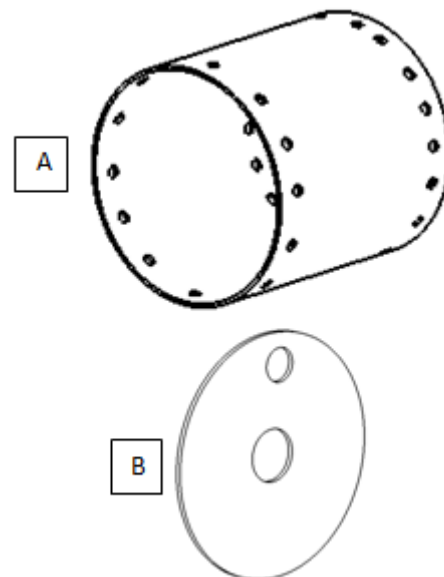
Isometric view of the designed seed drum, A and drum side cover, B for *melkassa* seeder
